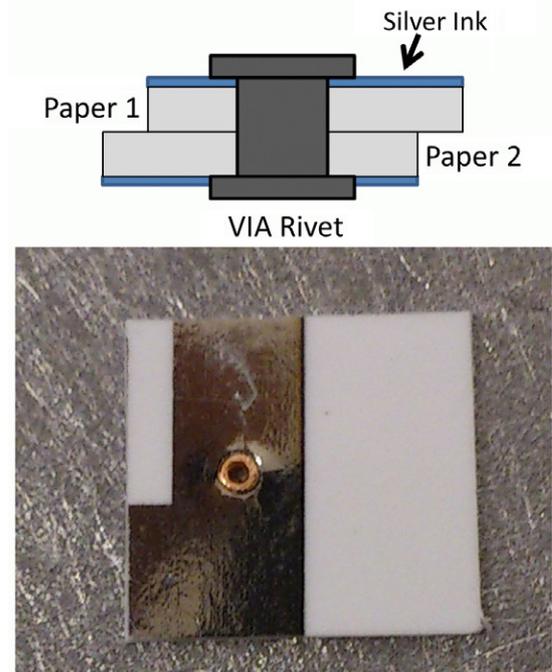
A VIA copper rivet mounted through two layers of paper contacting the silver conductors on both sides.
